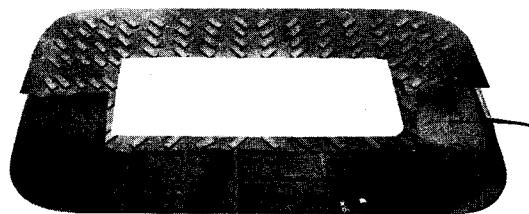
SHELL FORM TRANSFORMER COIL WITH PORTION CUT AWAY TO SHOW SPACER ARRANGEMENT
